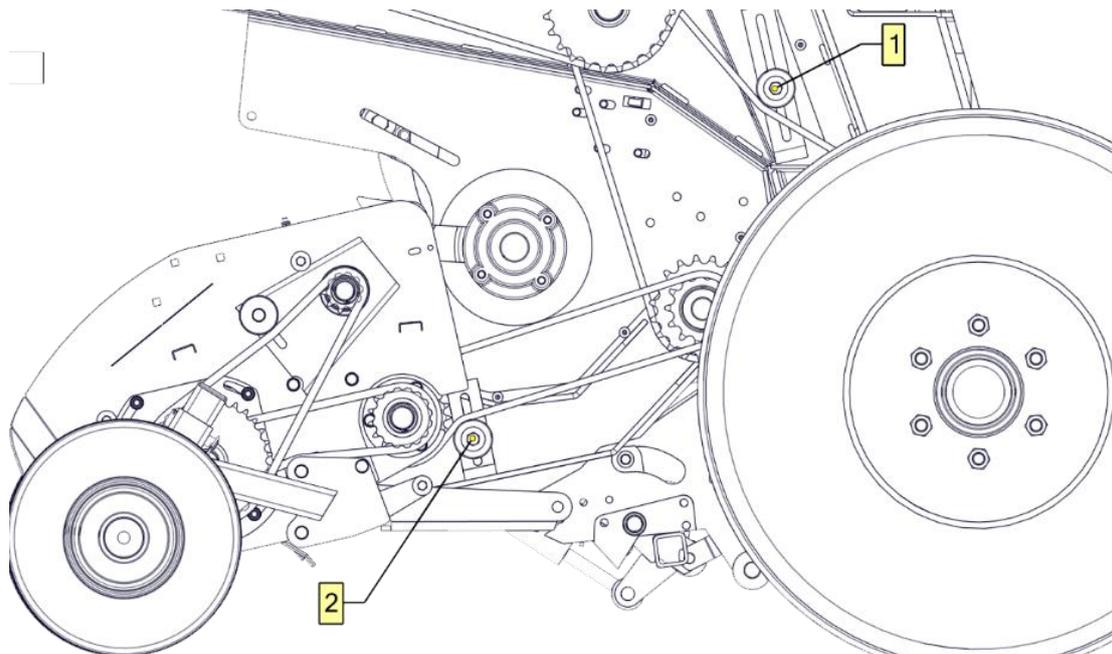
Adjusting the chain tension on the left-hand side of the baler
